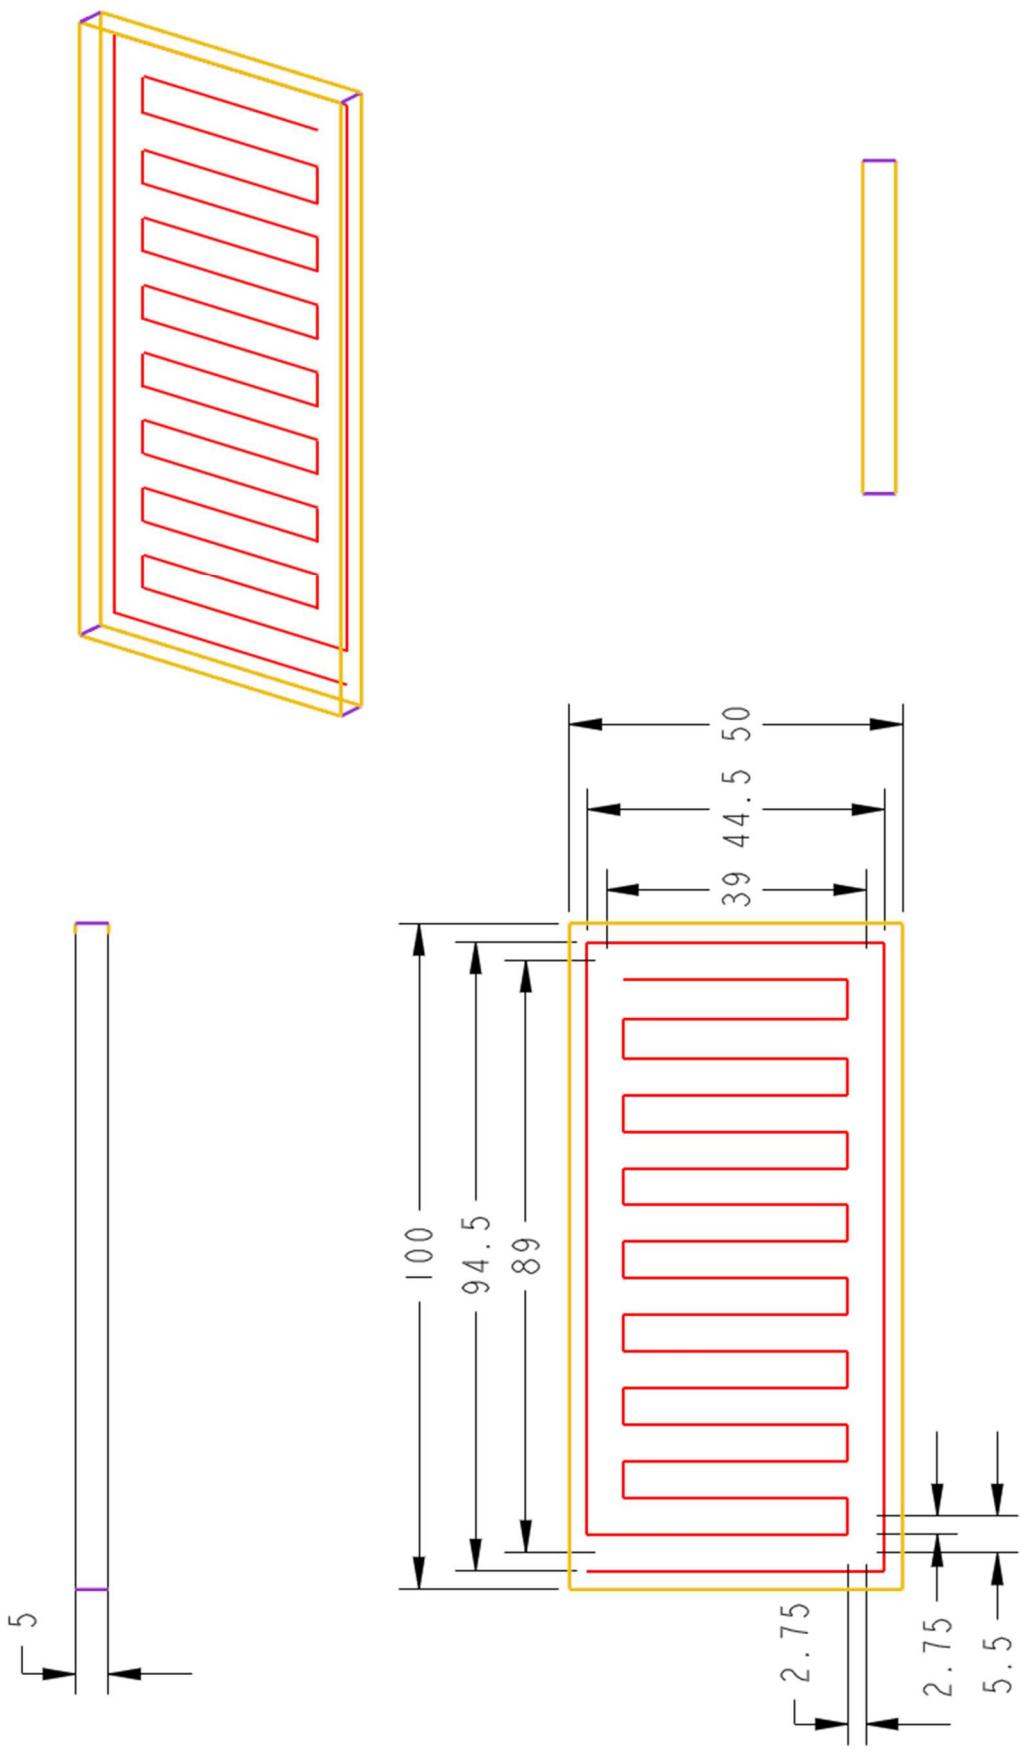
Rectangle 2D Layer Vertical Fill CAD Drawing.
